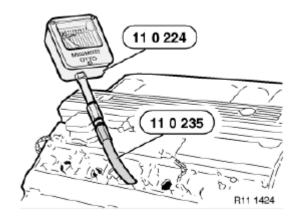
Connecting Special Tool (11 0 224) And Bar Pressure Adapter To Diagnosis Tester Courtesy of BMW OF NORTH AMERICA, INC.
